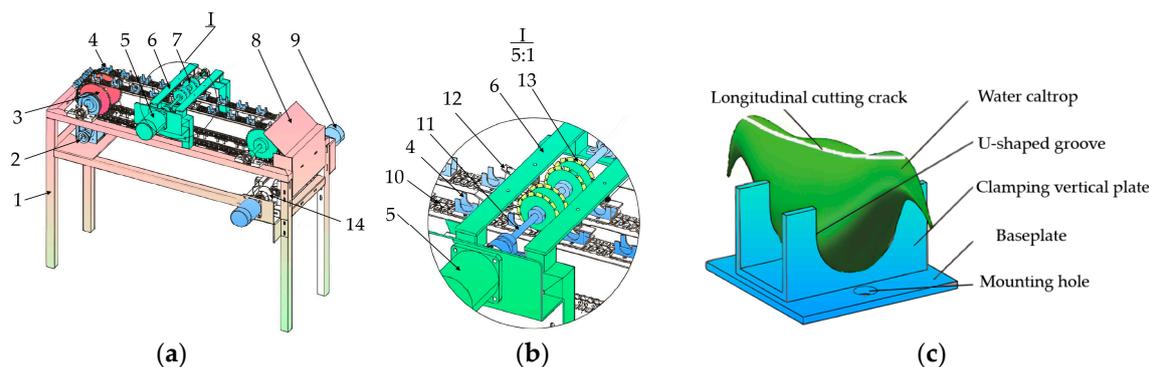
Clamping-type fresh water chestnut dehulling machine: (a) horizontal cutting and dehulling device; (b) local enlargement; (c) clamping-type device; (1) frame; (2) pulley I; (3) chain wheel; (4) baseplate; (5) transversal cutting motor; (6) beam; (7) transversal cutting blade; (8) retaining plate; (9) rubber roller motor; (10) chain; (11) blade shaft; (12) elastic strip; (13) transversal cutting blade; (14) rubber roller.
